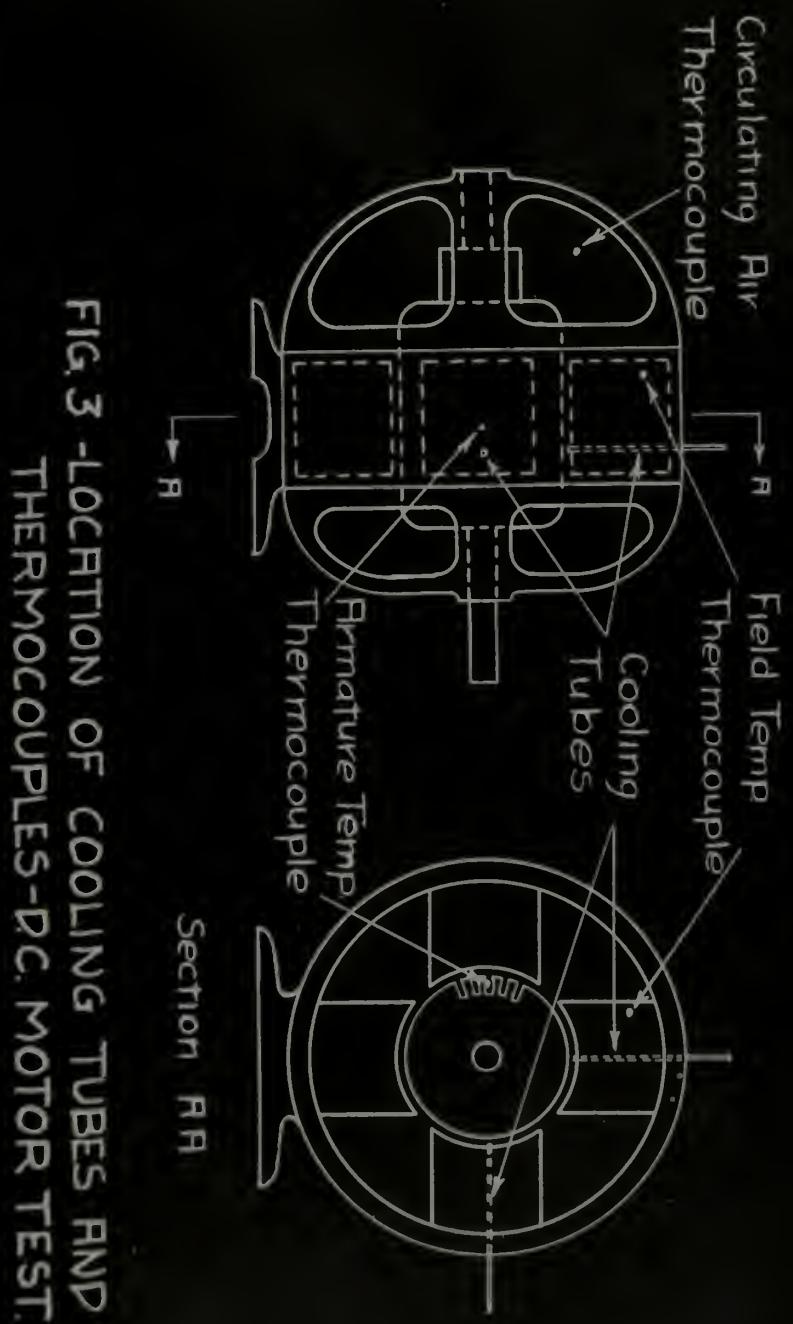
LOCATION OF COOLING TUBES AND THERMOCOUPLES-DC. MOTOR TEST.
